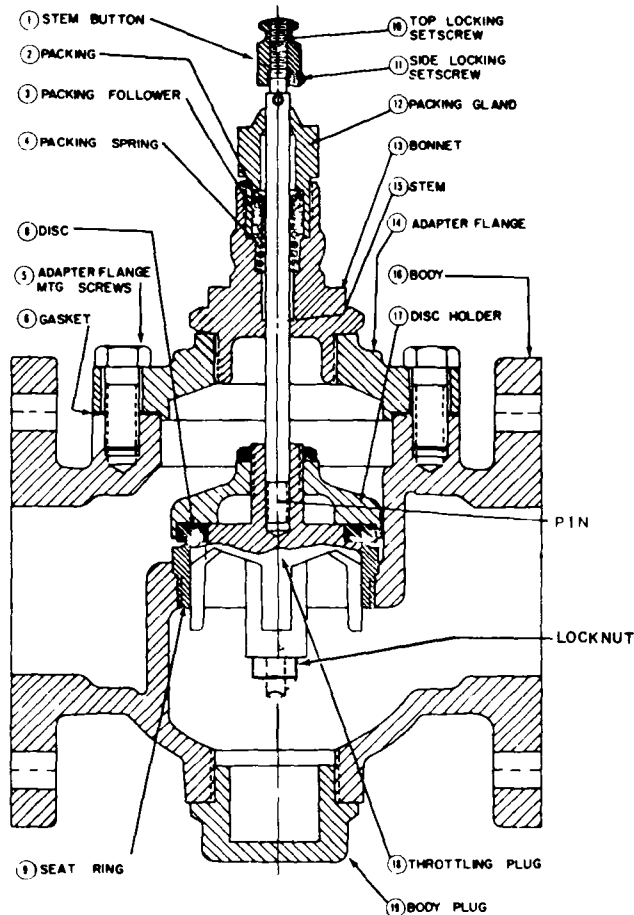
Cutaway of Typical V5011A and D Flanged Type Body
